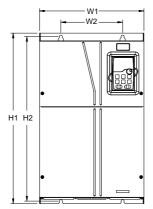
Wall mounting for 660V 22-132kW VFD models
